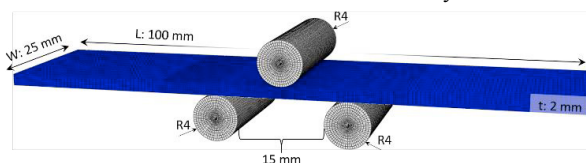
Drawing showing the experimental set-up and the dimensions of the sub-size weld specimens being used in the bend testing trials.
